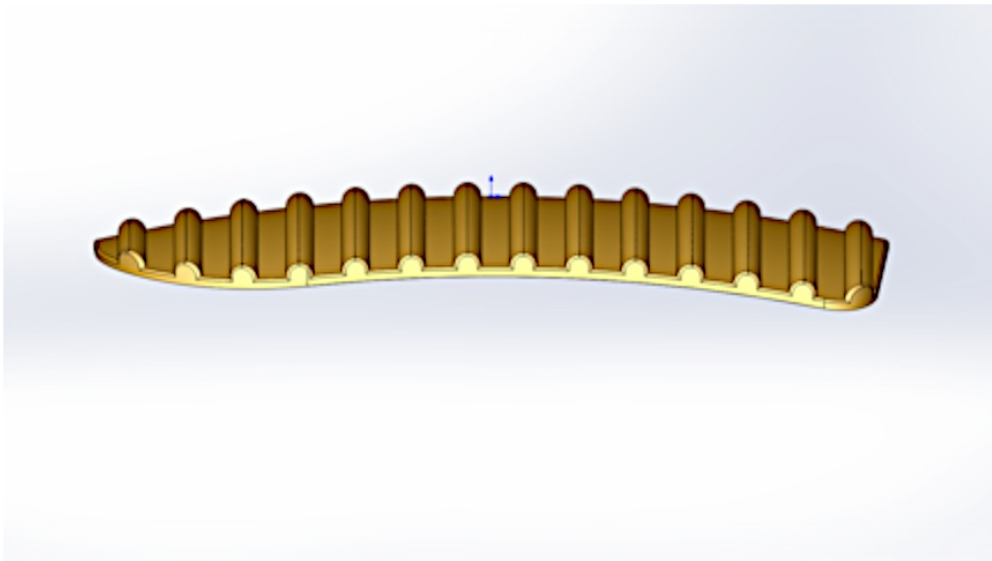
Concept Design for Patch Torque Device, Side View [drawing]
